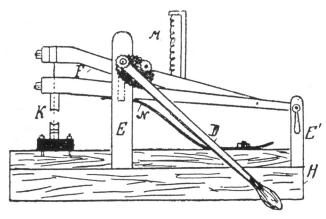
"Körnel pressing machine" (*Körneldruckmaschine*) (Parkert 1925:186).
